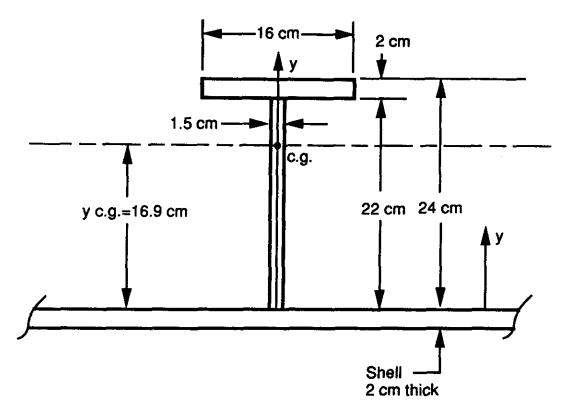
Circular Rings and Longitudinal Reinforcements Cross Section
